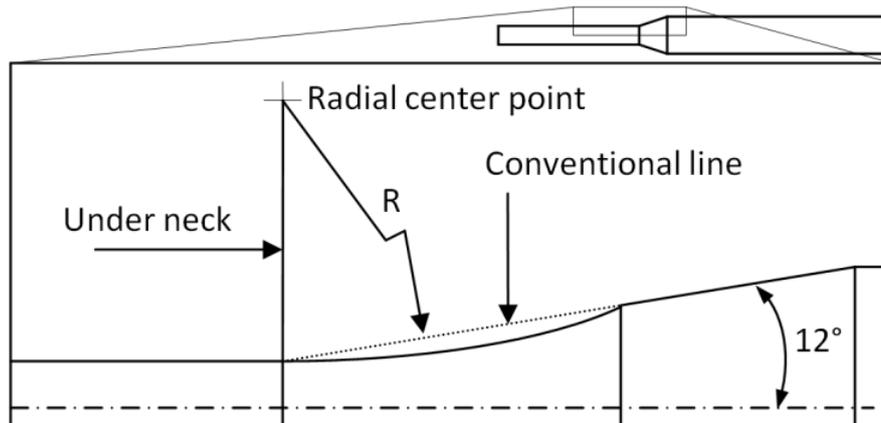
Cutting tool with rounded edge at the intersection of the constant tool shaft diameter and the conical part (adapted from [39]).
